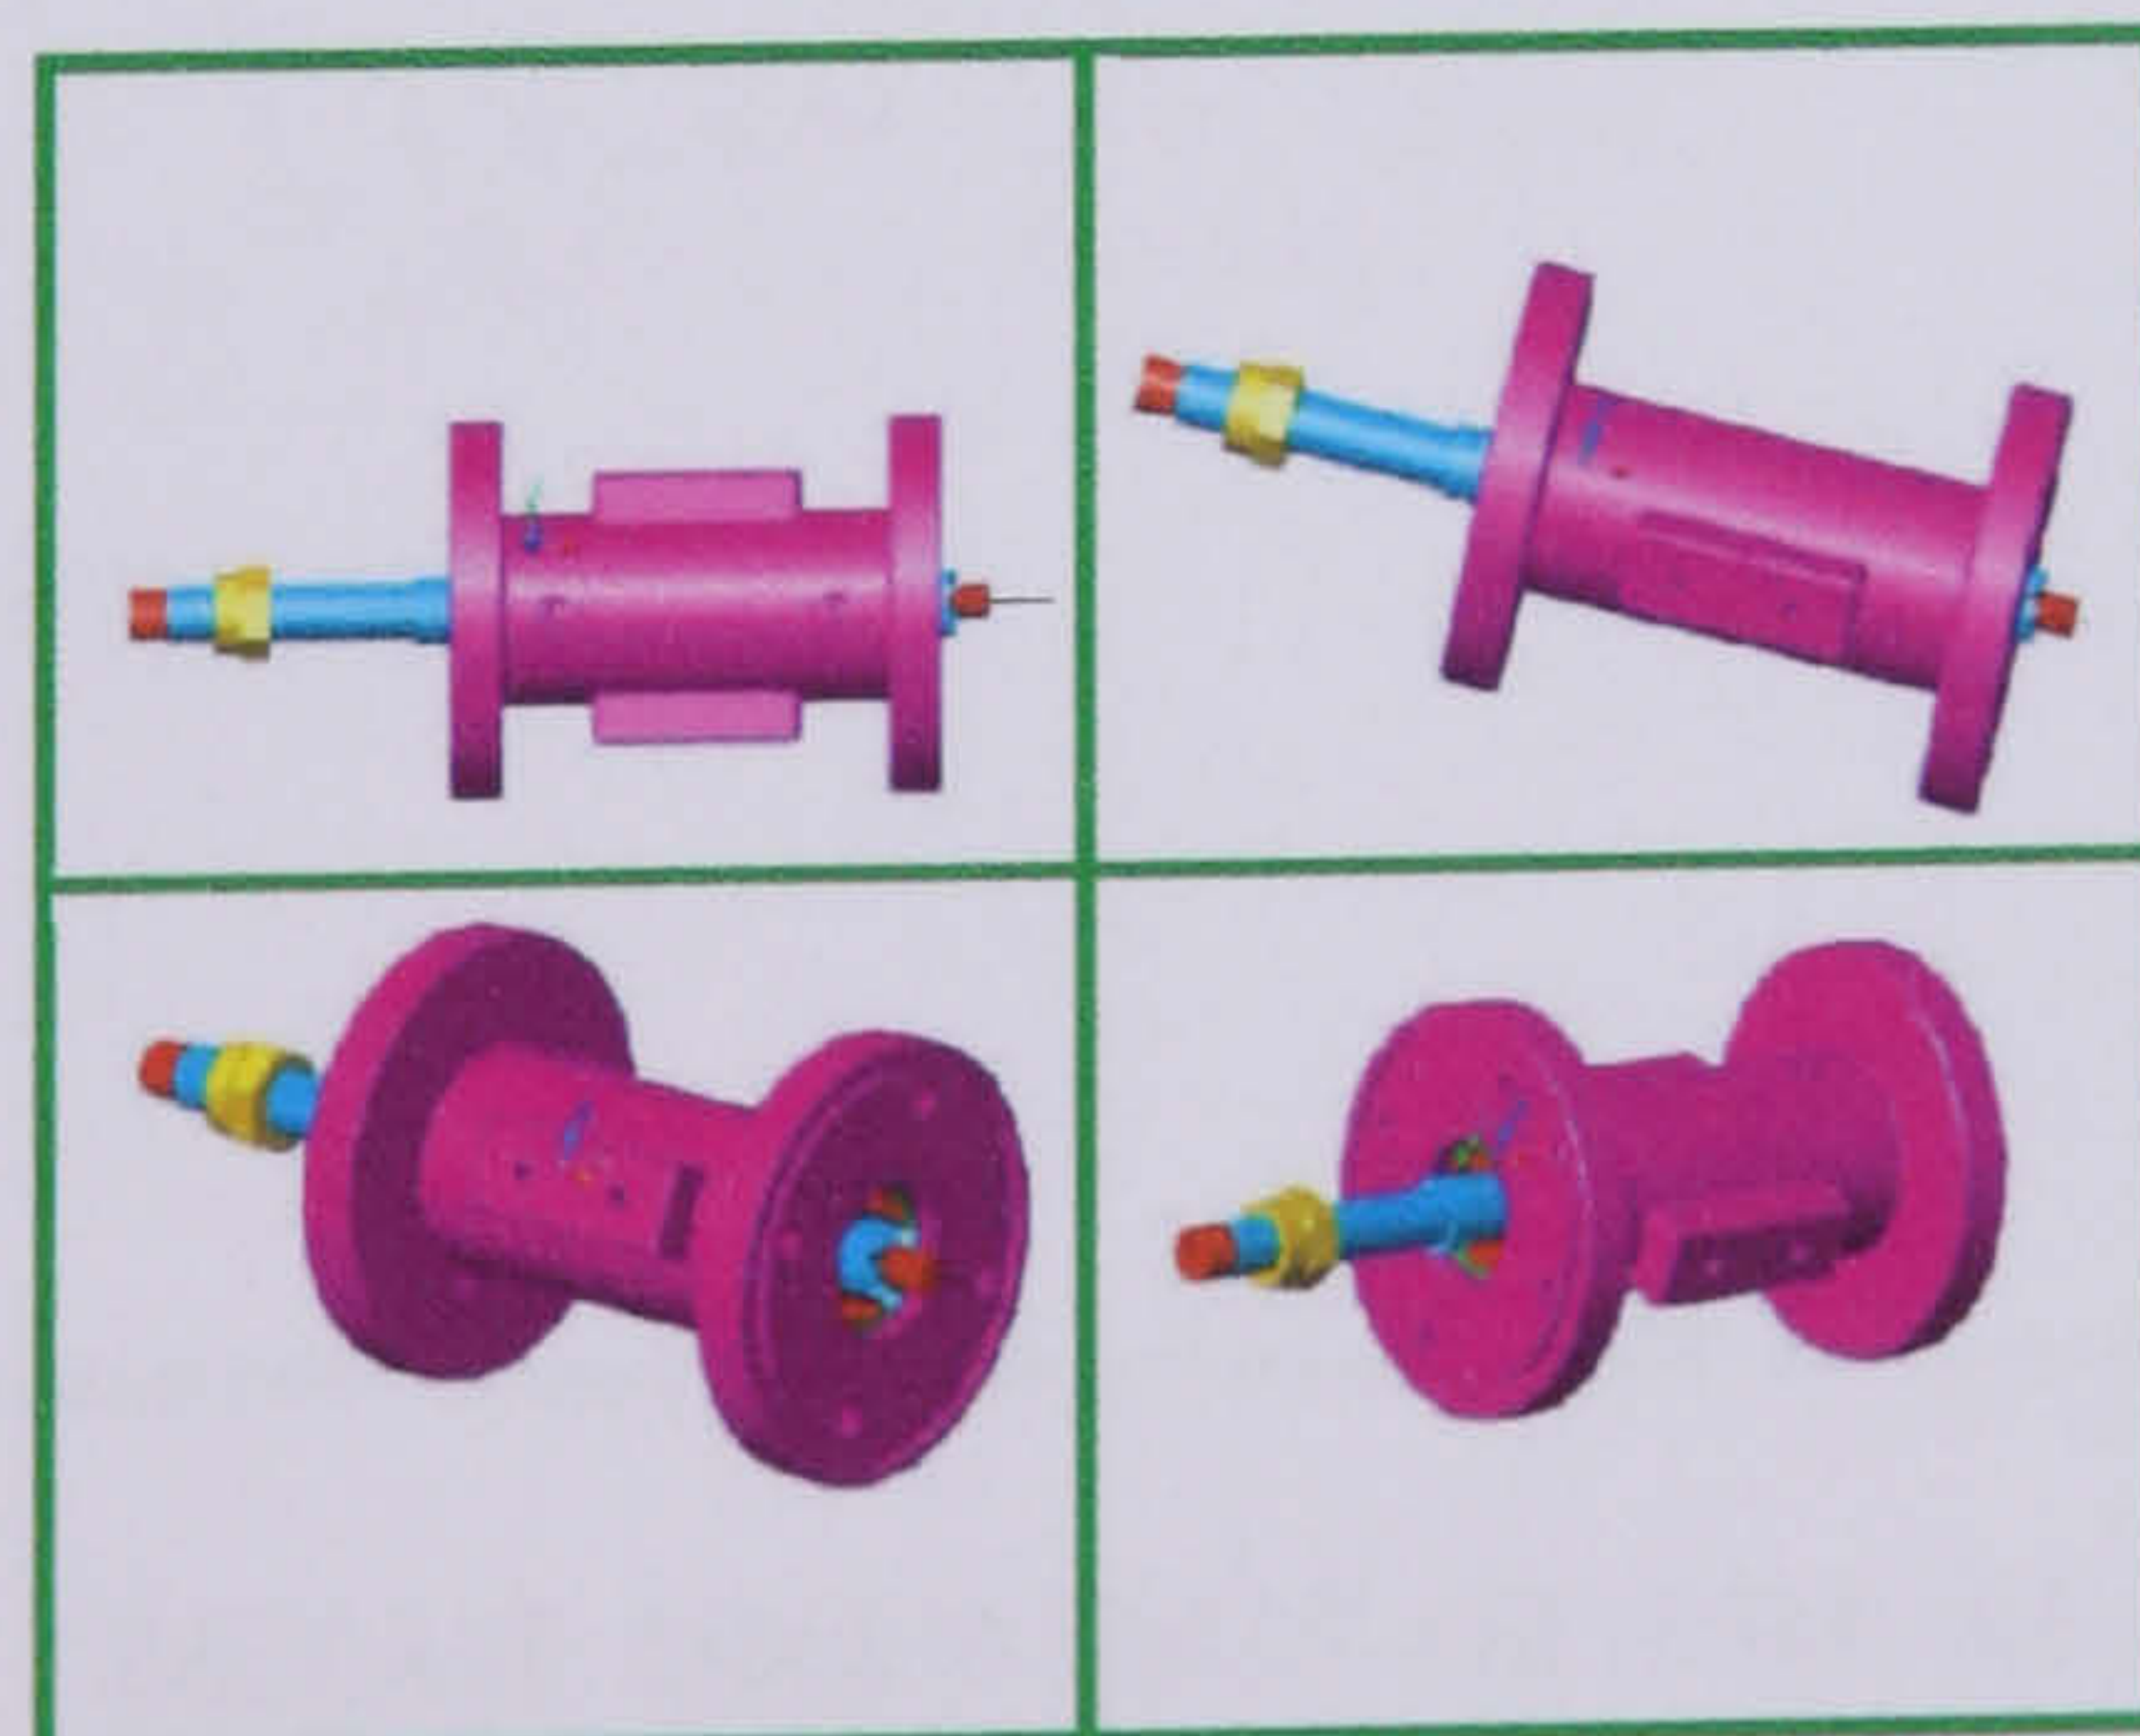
THREE DIMENSIONAL SOLID MODEL DIAGRAM OF BEARING HOUSING
